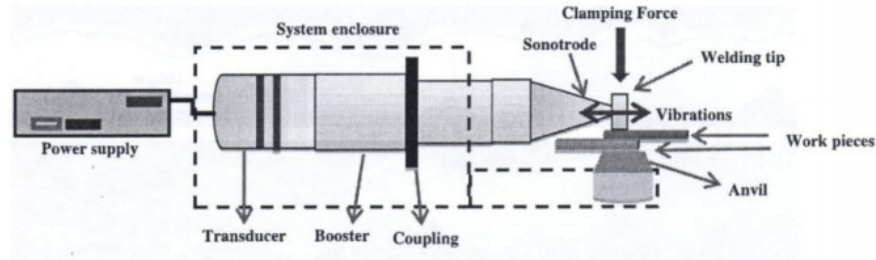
Ultrasonic welding schematic drawing[26]
